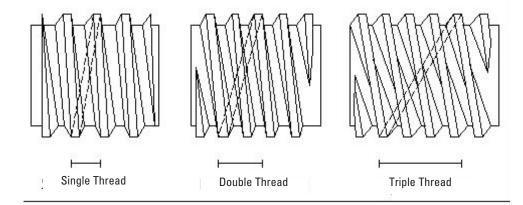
When cutting multiple threads, increase the lead to make room for succeesding threads.
